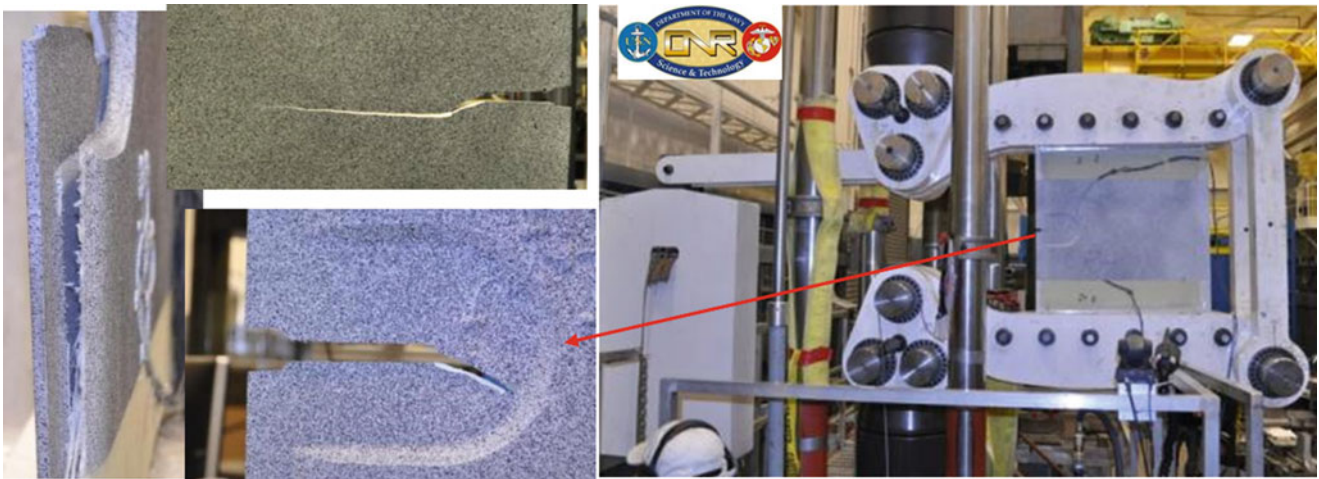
Ductile tearing specimen failure (*left*) and test fixture (*right*)
